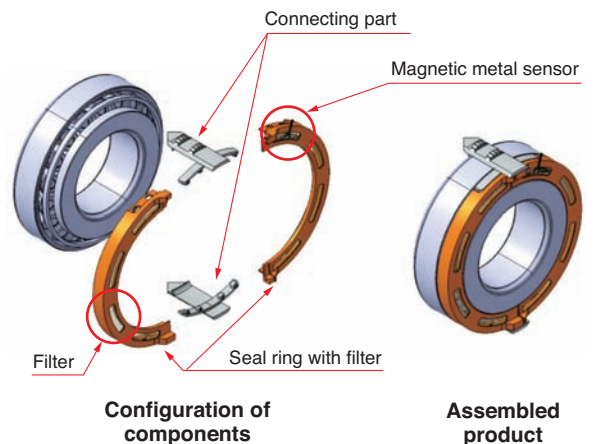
"Tapered Roller Bearings" with early failure detection sensor
